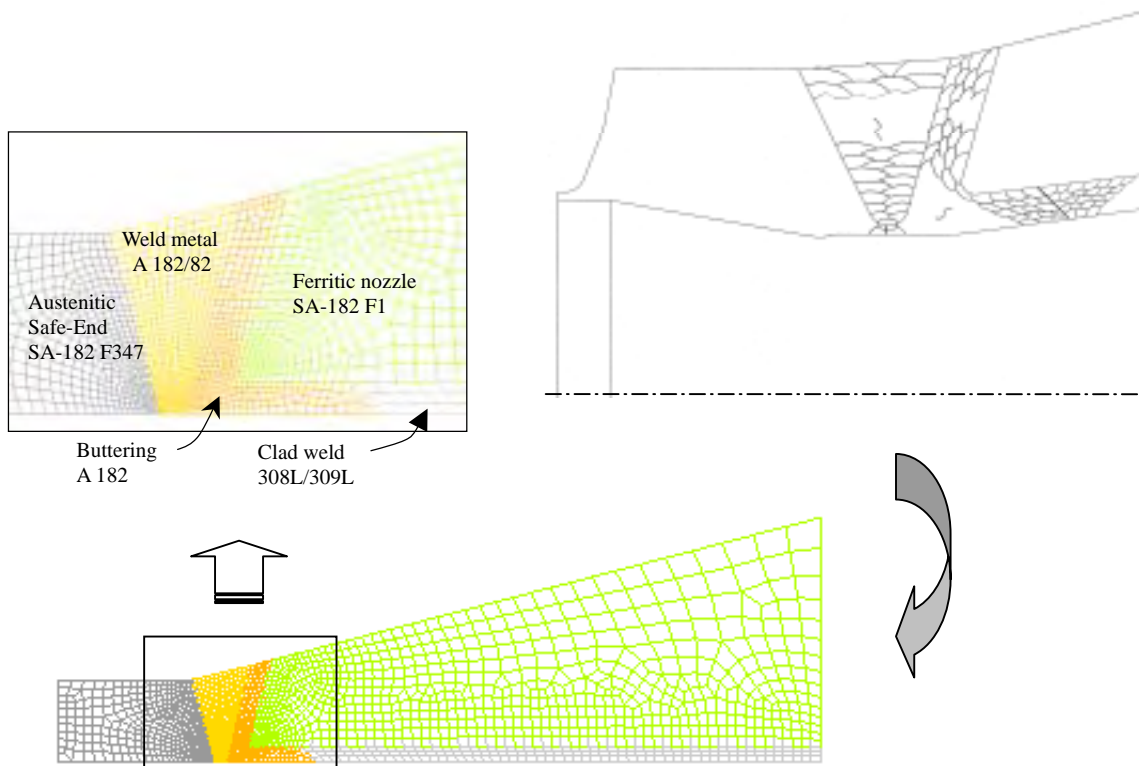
An axisymmetric FE model of the dissimilar metal weld nozzle developed for the stress analysis and fracture mechanics evaluation
